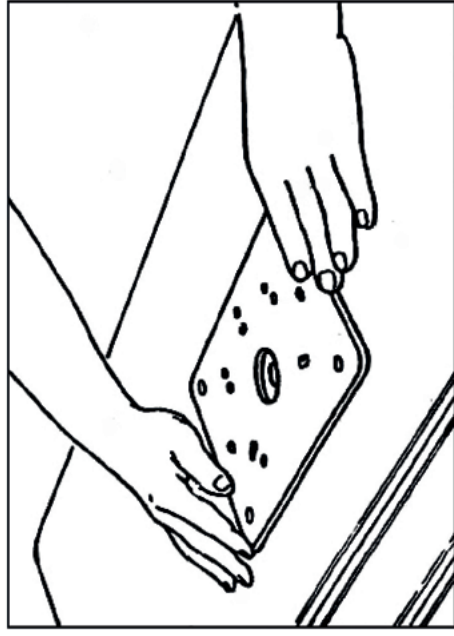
Drill mounting holes into the table plate and countersink or counter bore the top side of table plate so the head mounting screws are slightly below its surface.
